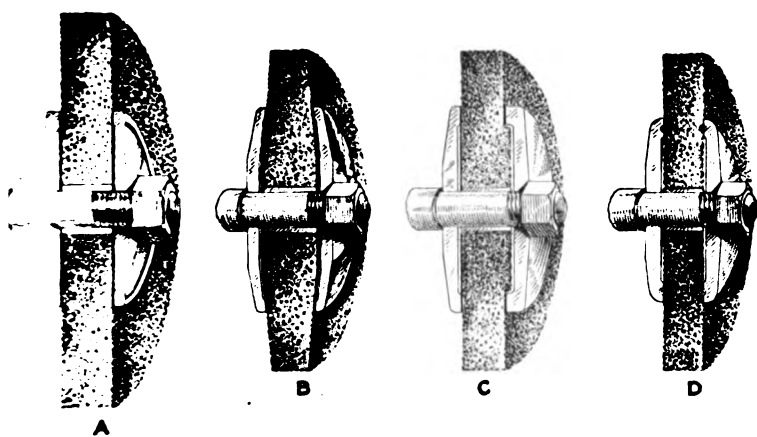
FOUR METHODS OF MOUNTING GRINDING WHEELS
